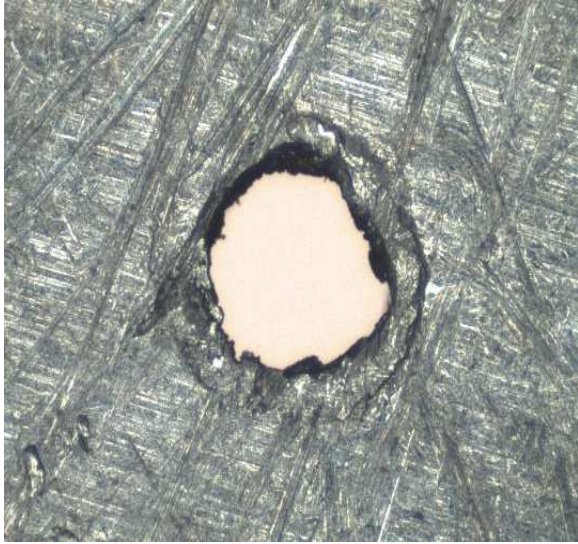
Micro-perforation of sample 6M using laser cutting and drilling, Aluminum sheet
